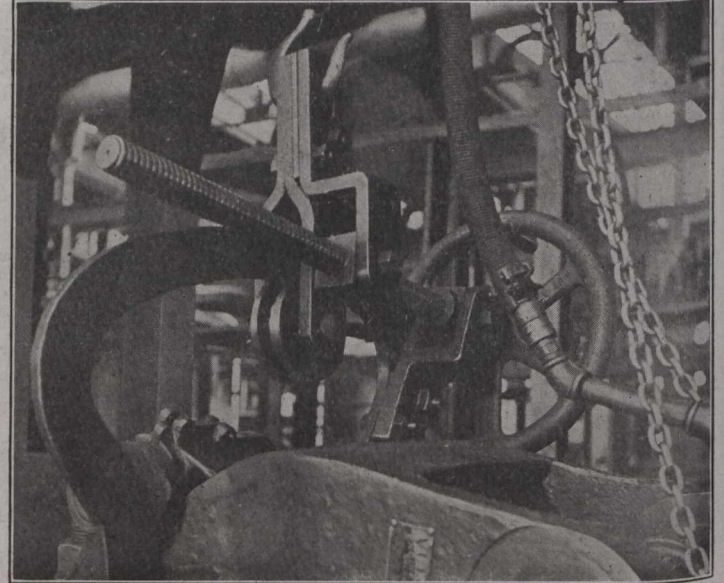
Suspending Mechanism for Bull Rivetters.
